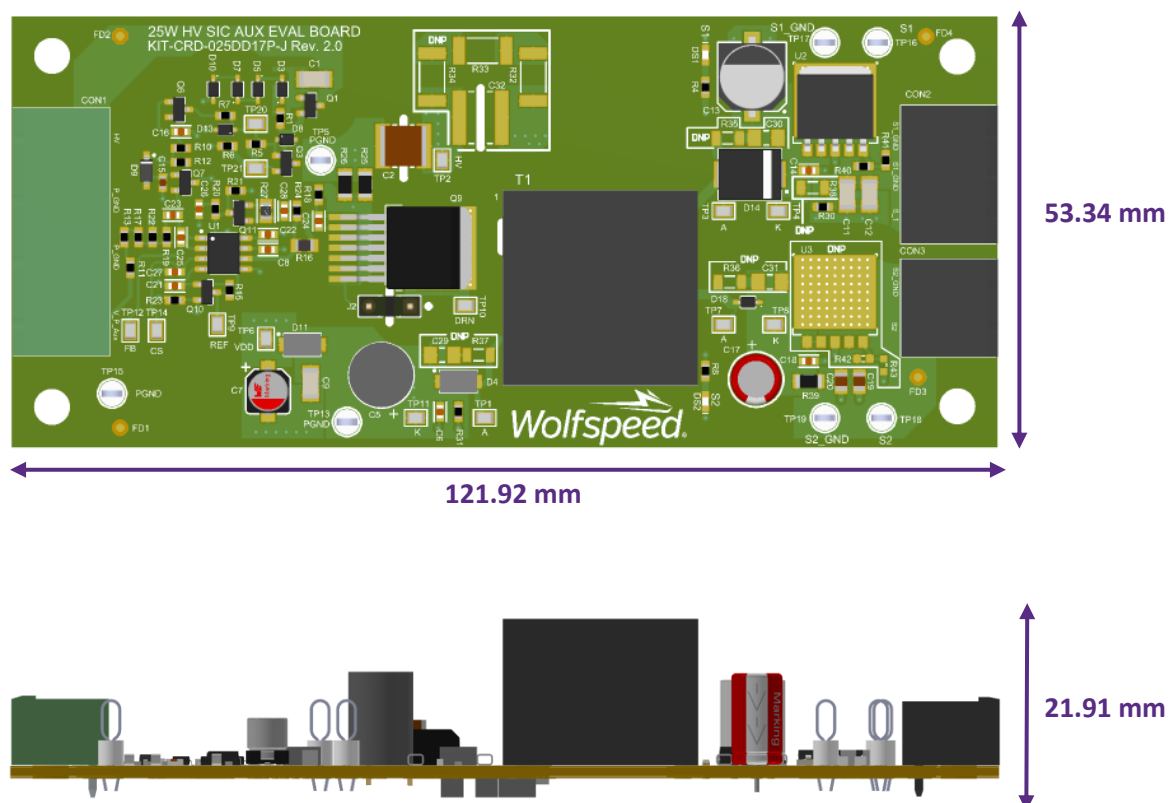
KIT-CRD-025DD17P-J Product Dimensions: Top view (top) and Front View (bottom)
